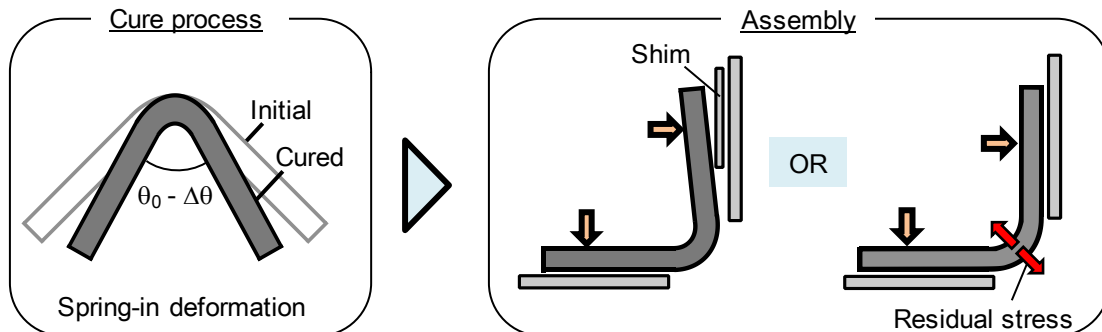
Spring-in deformation in curved composites. Shimming process is required or residual stress is induced during assembly.
